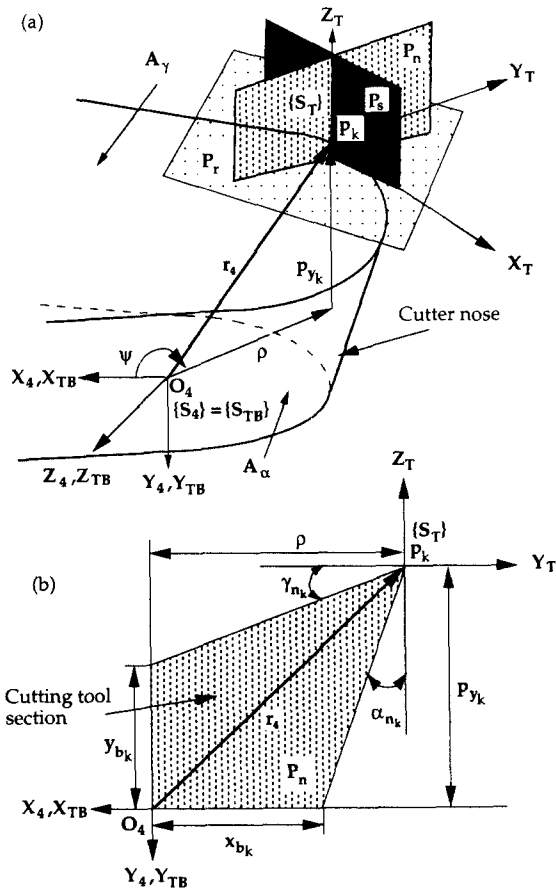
(a) CUTTER NOSE OF THE SINGLE-POINT TOOL
